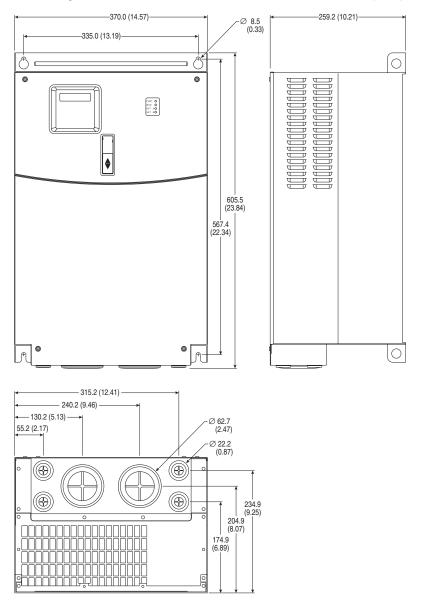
PowerFlex 400 Frame E Drive - Dimensions are in millimeters and (inches)
